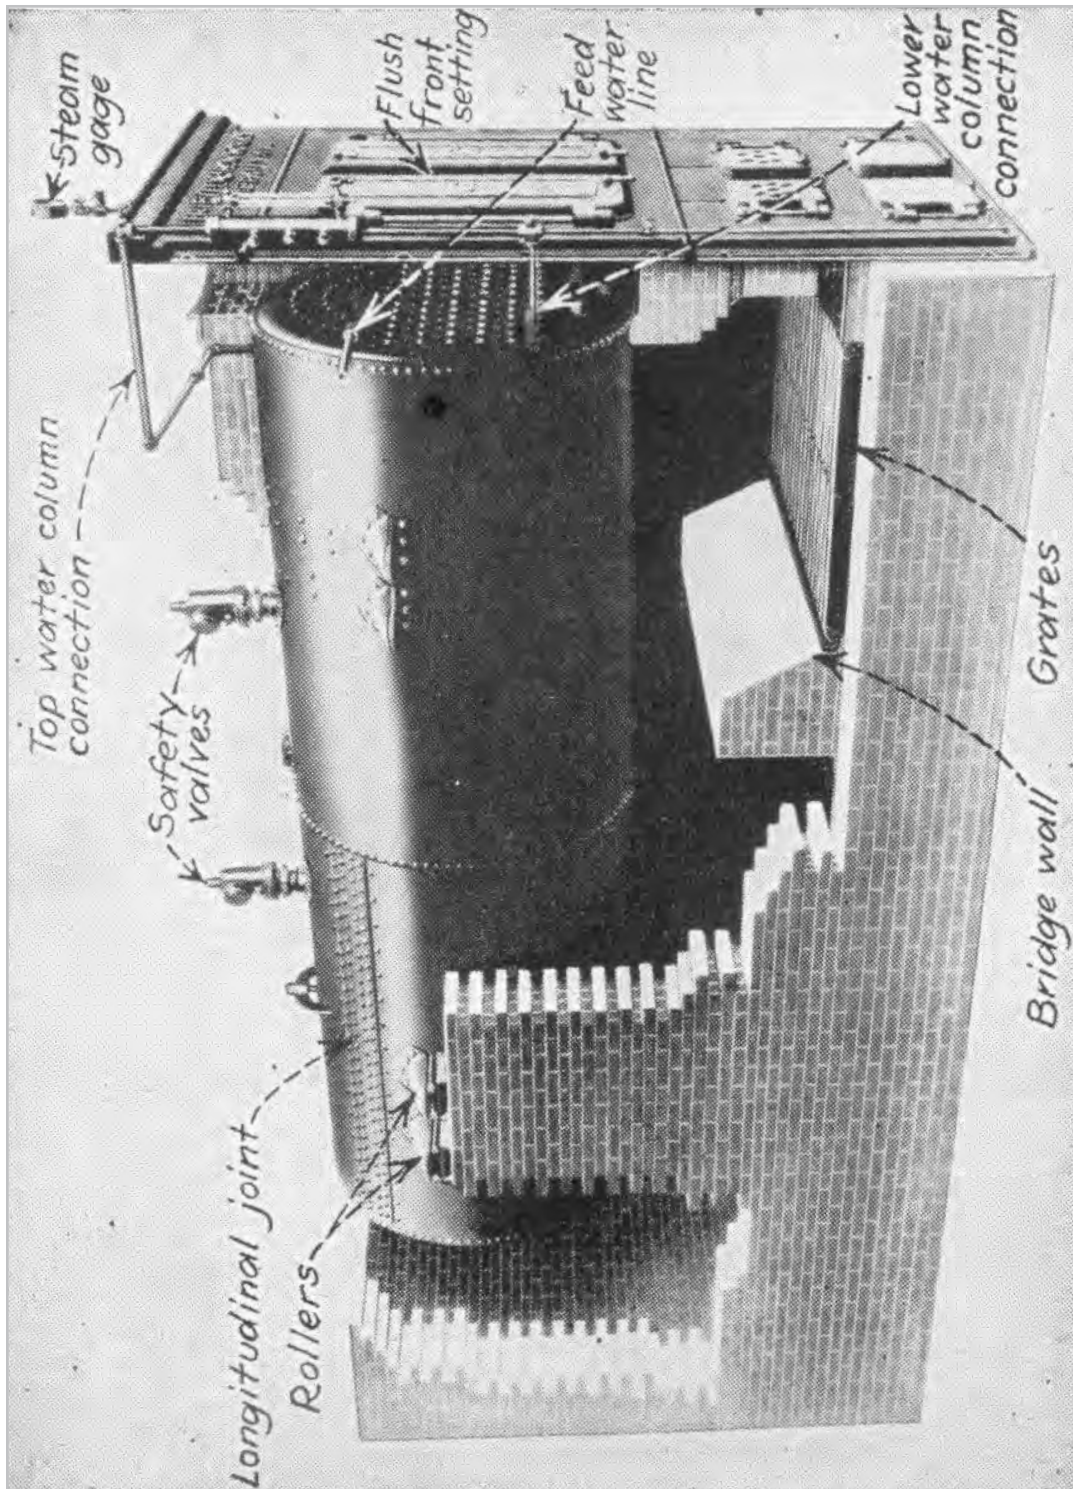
Typical Horizontal-tube Boiler with Nomenclature. Boilers similar to this were found on the ATP Site. Several boilers of similar design were often employed to provide steam to the dye houses. Source: Woodruff and Lammers 1950.
